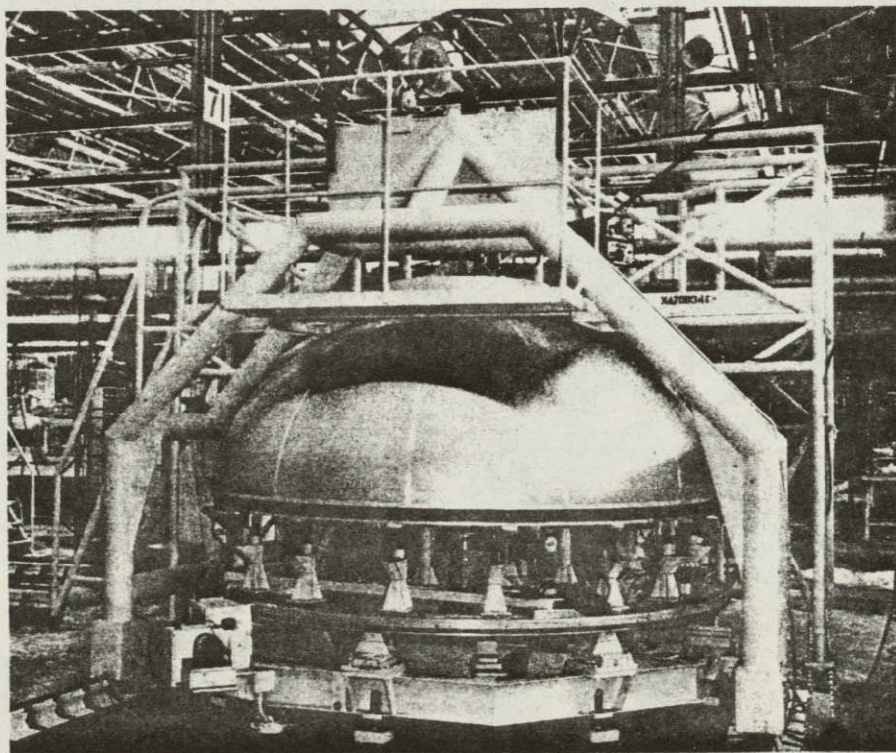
Forward bulkhead in cap welding fixture.
